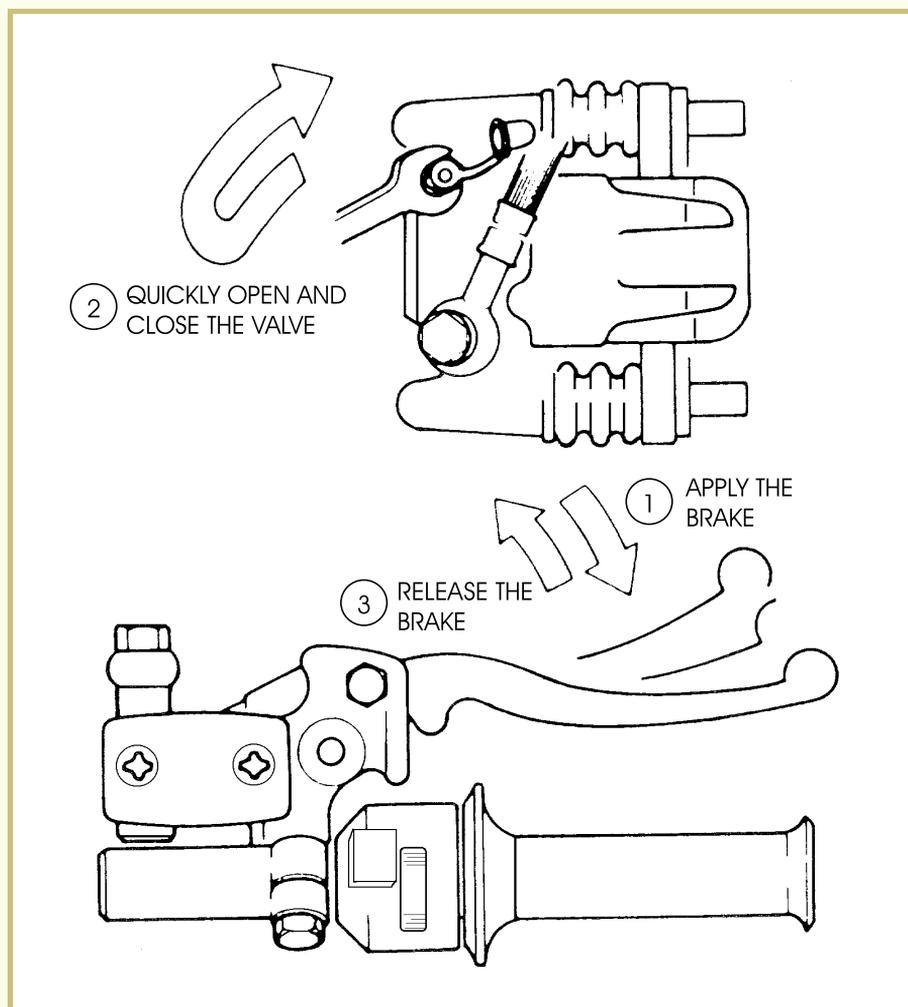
The operating components of an ATV hydraulic-brake master cylinder are identical to those found on a motorcycle master cylinder. (Courtesy Kawasaki Motor Corp., U.S.A.)
